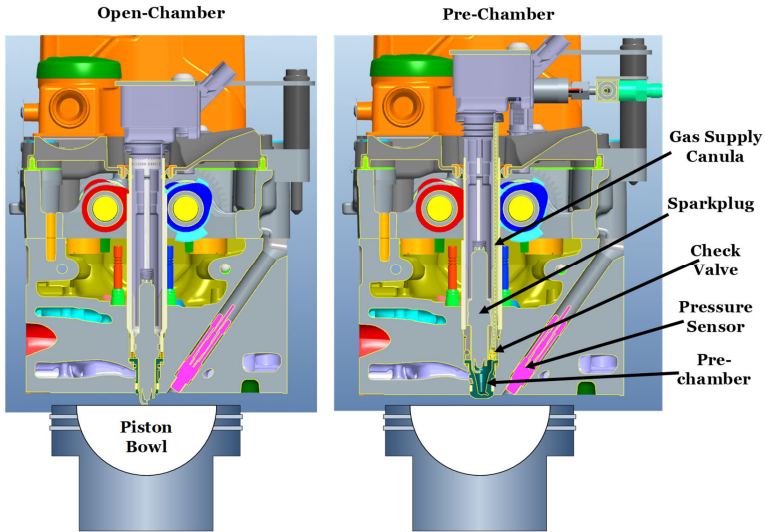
Scheme of the combustion chamber layout, Open-chamber (left), PC (right)
